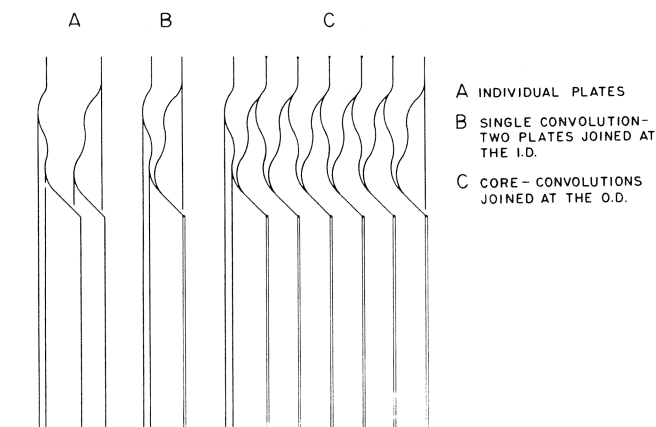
Schematic Representation of Bellows Core Welding Sequence.
